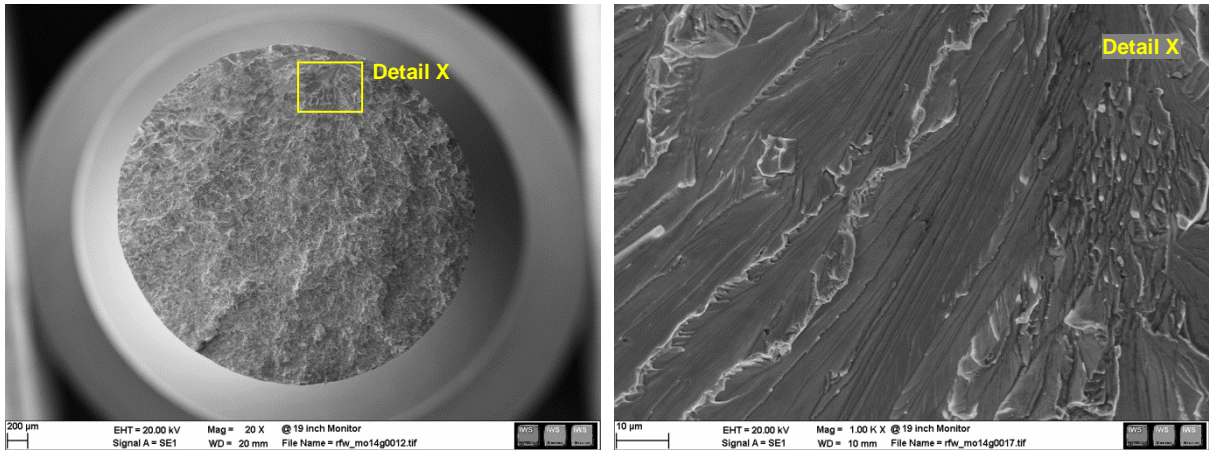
Ductile fracture surface and detail X for room-temperature tensile specimen W-09 RRS2
